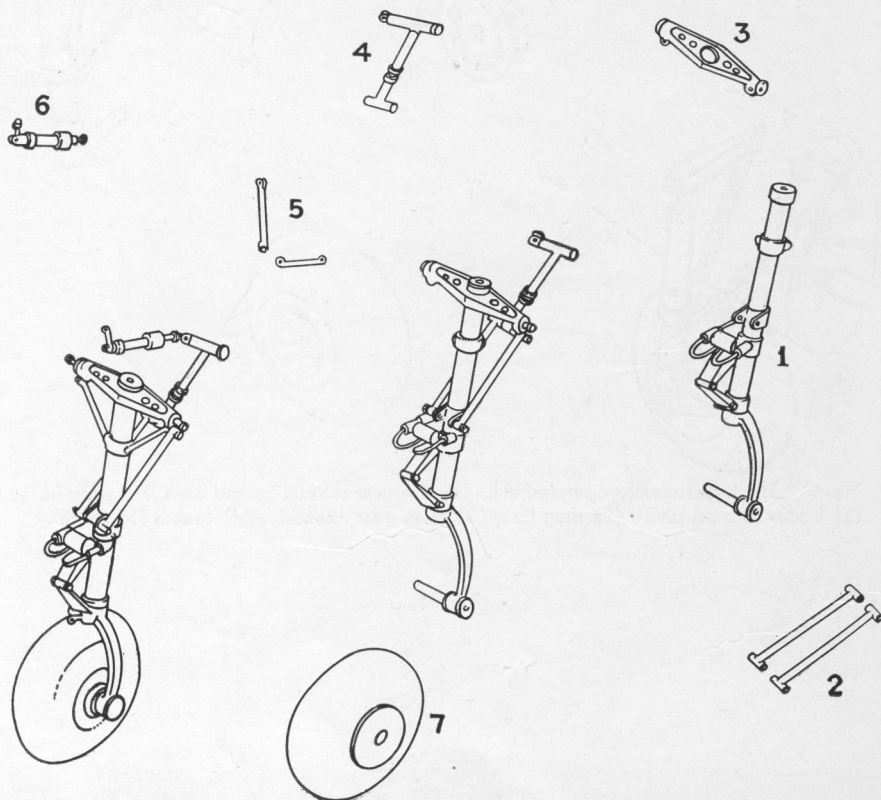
The nose wheel retracts back and up into the well in the fuselage. This exploded view shows (1) nose gear assembly; (2) drag struts; (3) fulcrum; (4) torque lever; (5) side struts; (6) actuating cylinder; (7) 27-in. wheel.
